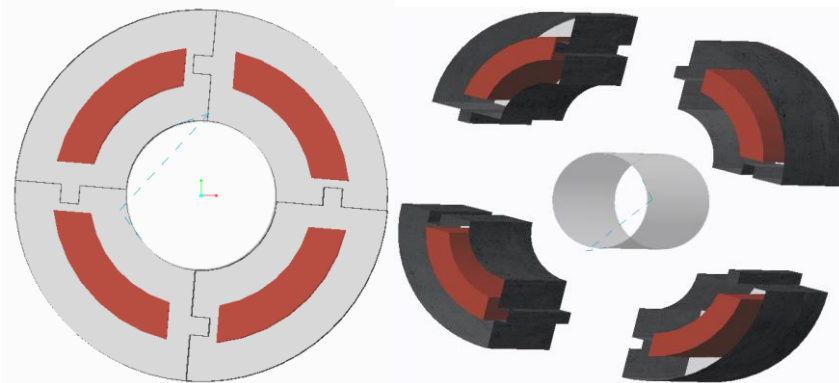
Solid Material Storage Bricks composed of Bauxite & Concrete
